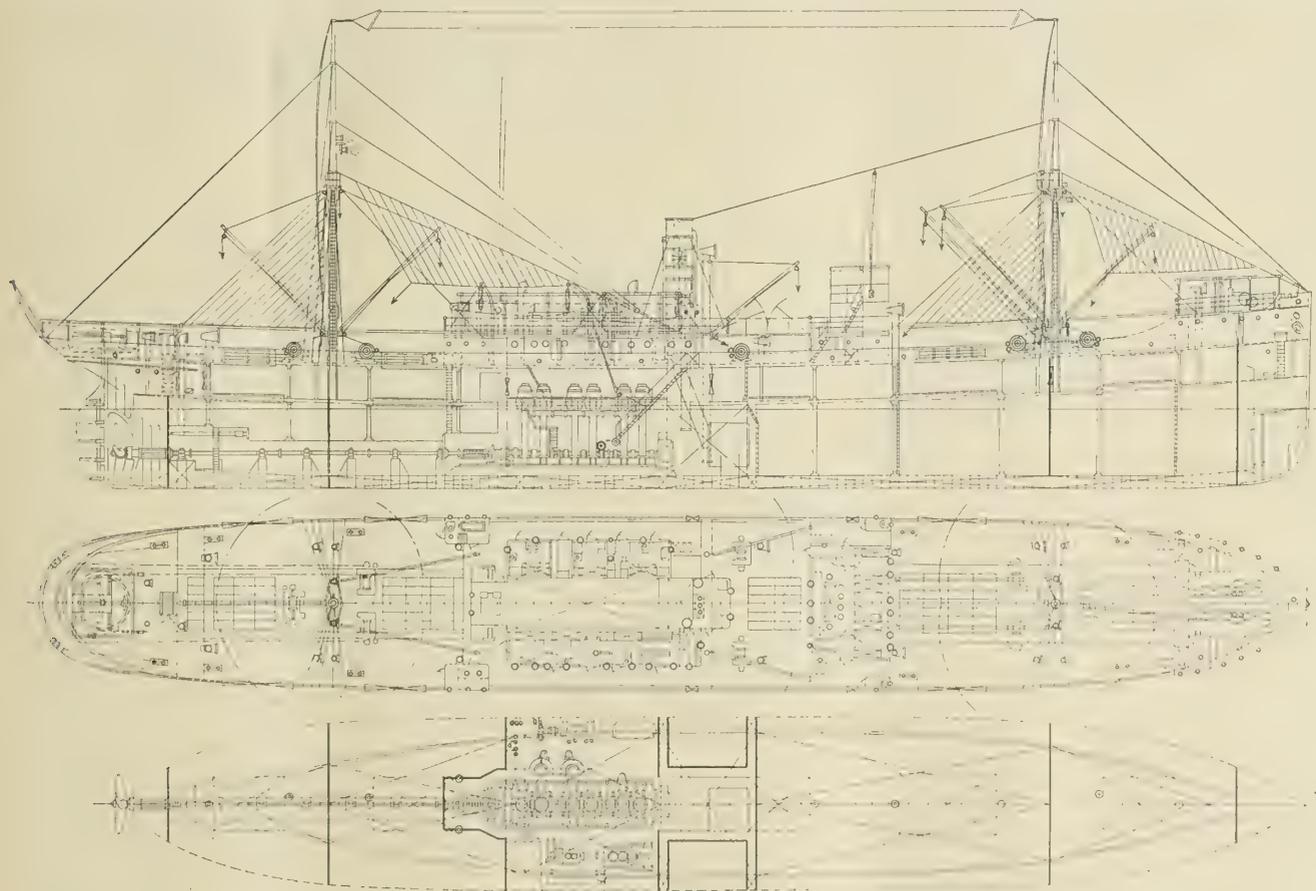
PROFILE AND DECK PLANS OF THE ROLANDSECK
